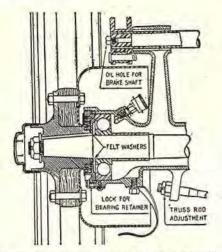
Sectional view of the Franklin model "9B" rear wheel, showing the location of the felt washers.
